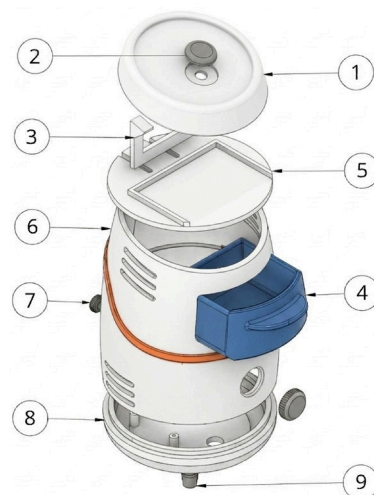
Exploded view CAD breakdown: 1. cover; 2. hole cover; 3. mechanism support; 4. drawer; 5. drawer support; 6. body; 7. cable outlet cap; 8. base; 9. mounting support.
